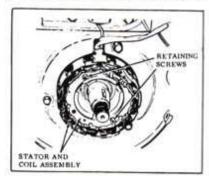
Ignition generator coil and stator serviced only as an assembly.
